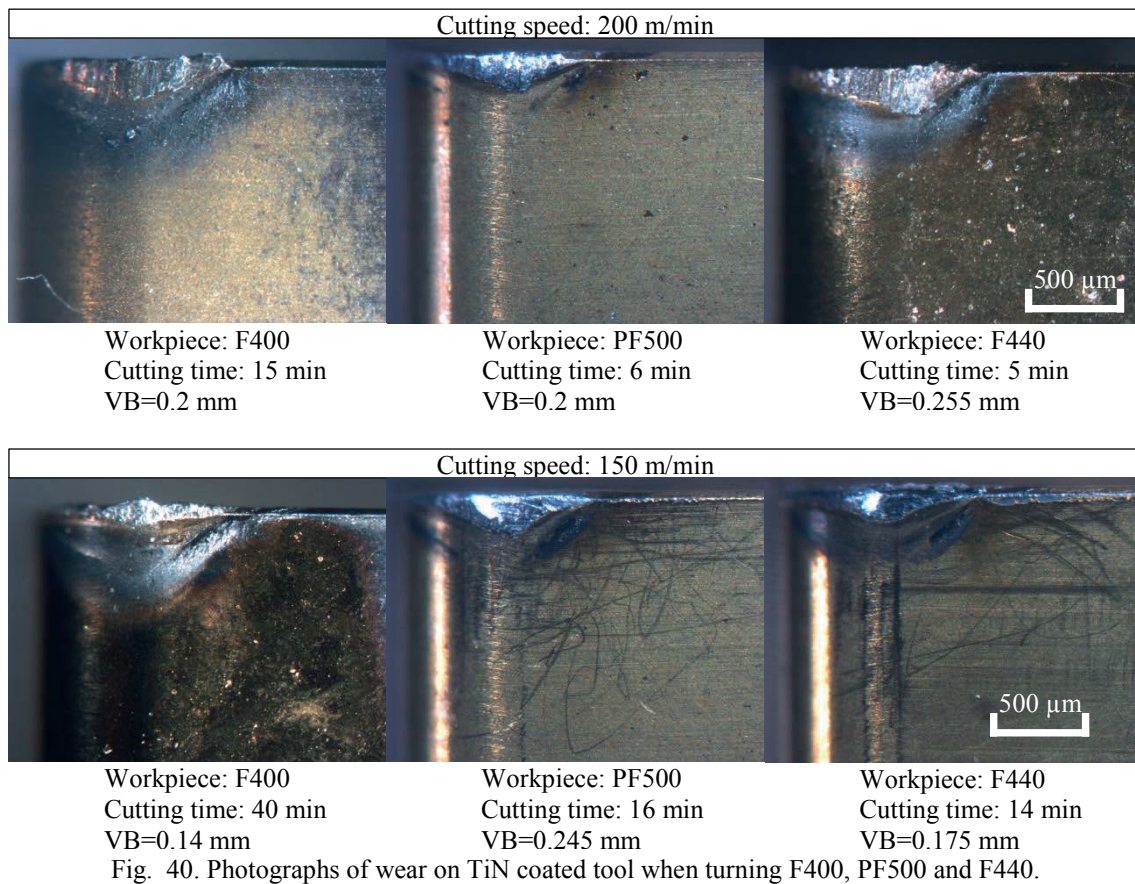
Photographs of wear on TiN coated tool when turning F400, PF500 and F440.
